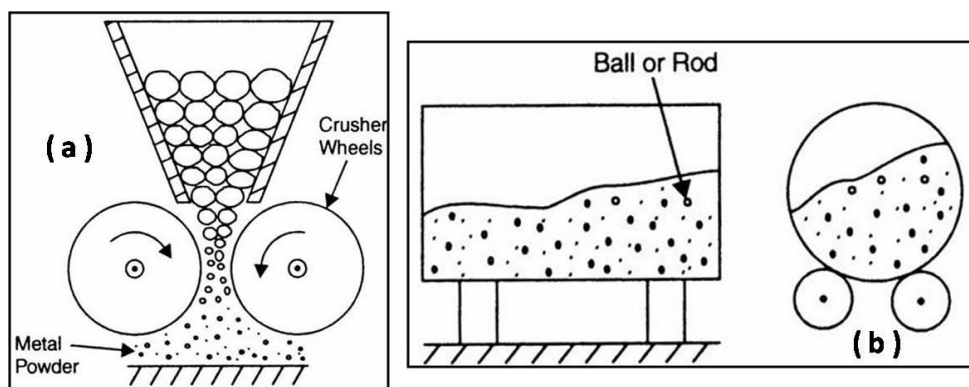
(a) Crushing & Milling (b) Ball or Rod Milling.
